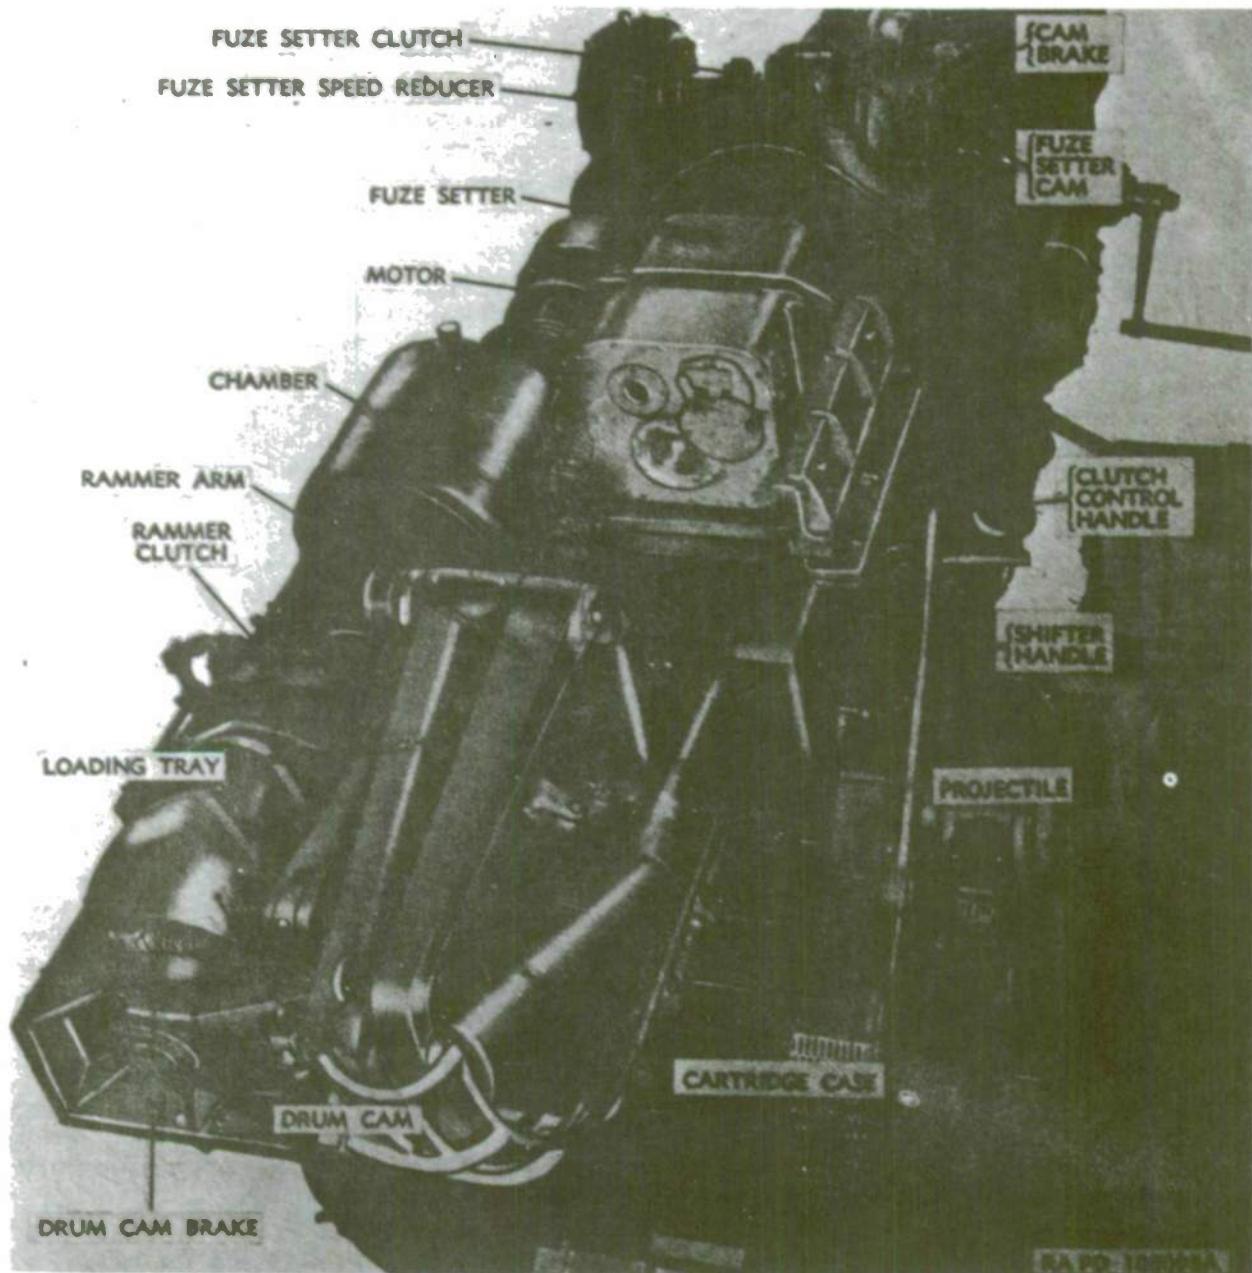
Power-Rammer, Arm Type, With Separate Fuze Setter Unit, Single Electric Motor Driving Both Units.
